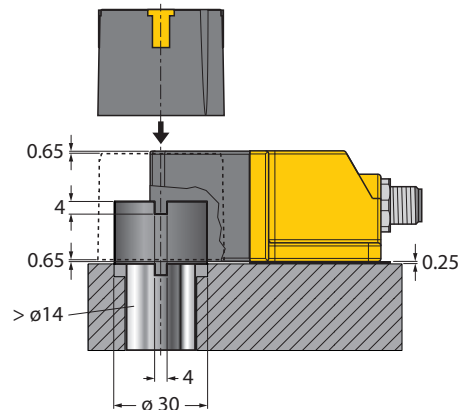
Mounting the sensor — shaft diameter greater than 14 mm
